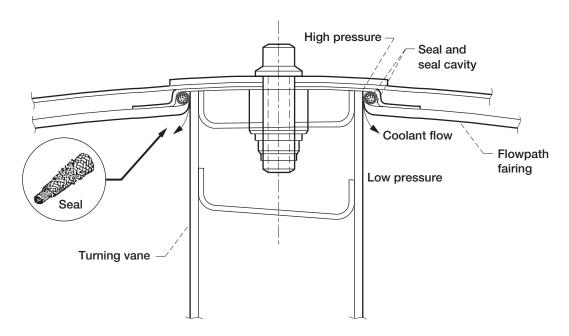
Cross section of PW F119 engine showing last-stage turning vane with hybrid braided seal sealing perimeter.
